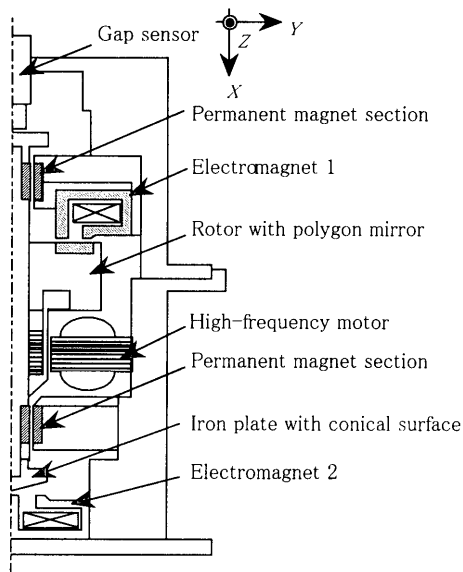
Configuration of the repulsive-type magnetic bearing. The rotor has an iron plate with a conical surface and a body with polygon mirror facets.
